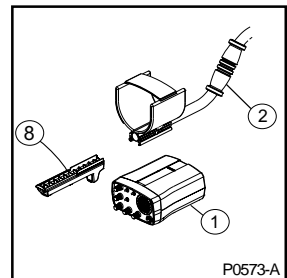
Mounting the Control Box to the Rear of the Shaft
